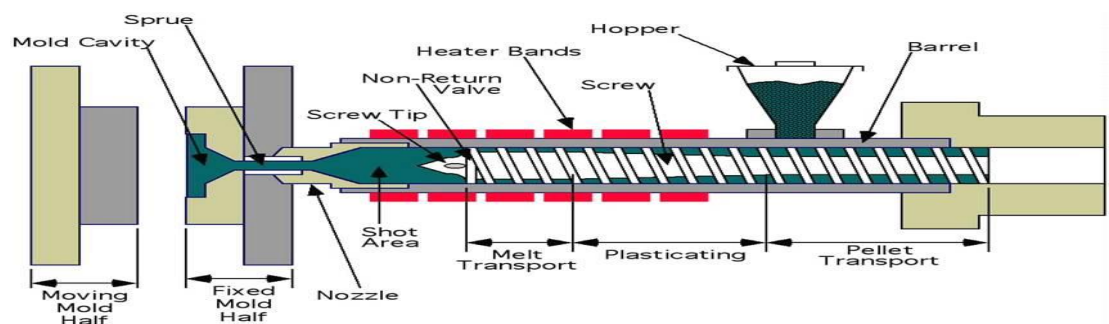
Typical Injection Moulding Machine (Gill, 2002)
